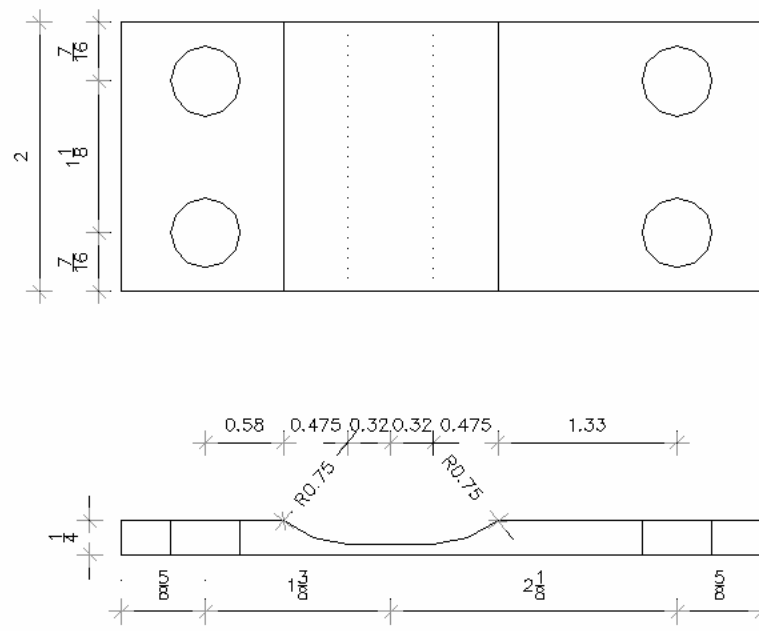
Typical flange plate with $L/t = 8.0$ (specimen type A)
